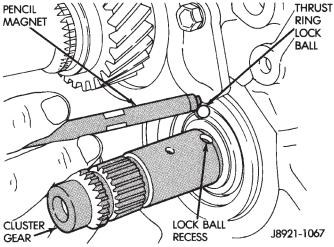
Remove Fifth Gear Thrust Ring Lock Ball
